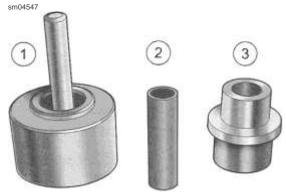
Install Isolator in Wheel DISASSEMBLE
